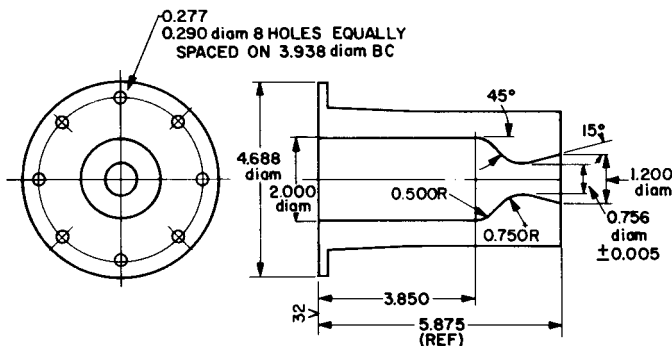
Control drawing of 100-lbf-thrust chambers
